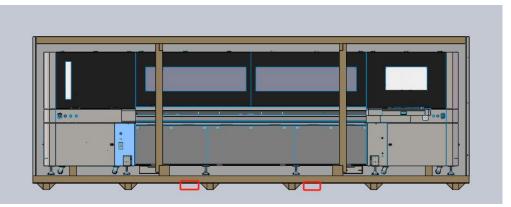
Packaging Case with the Top Plate and the Front Plate Removed
